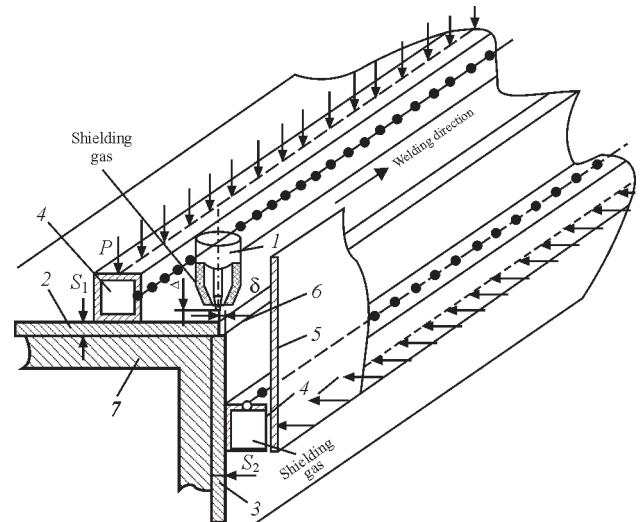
Scheme of moving welding torch along the butt: 1 — welding torch; 2, 3 — semi-products to be welded; 4 — gas channel for protection of the outer side of the workpiece; 5 — protective screen; 6 — gas channel for protection of the back side of the workpiece weld; 7 — force part of rigging
